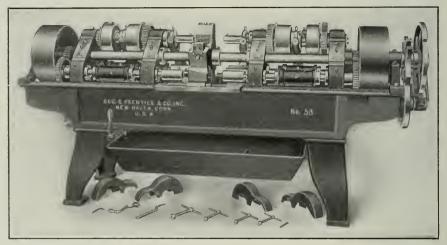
Prentice Six-Spindle Double-Head Automatic Turret Machine
